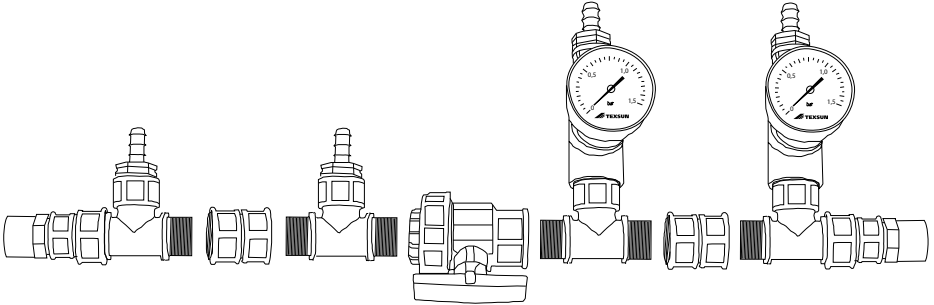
ASSEMBLING THE PRESSURE REGULATOR
